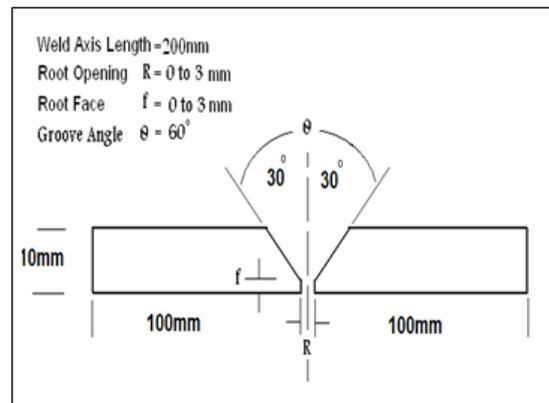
Welded joint details of S-V-groove butt weld (1G position) according to AWS code
